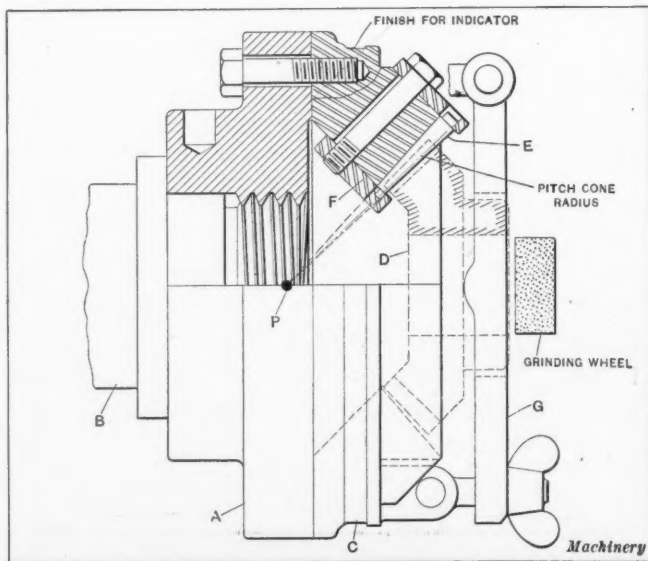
Detail View showing Construction of Bevel Gear Chuck illustrated in Fig. 21
